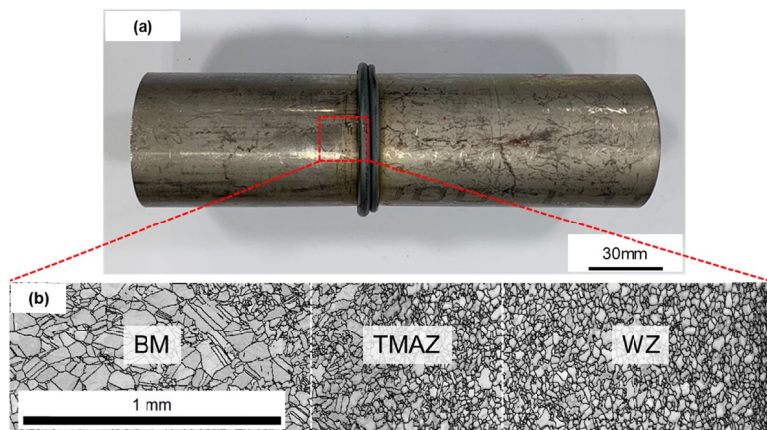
(a) Top view and (b) macrostructure of friction welded material
